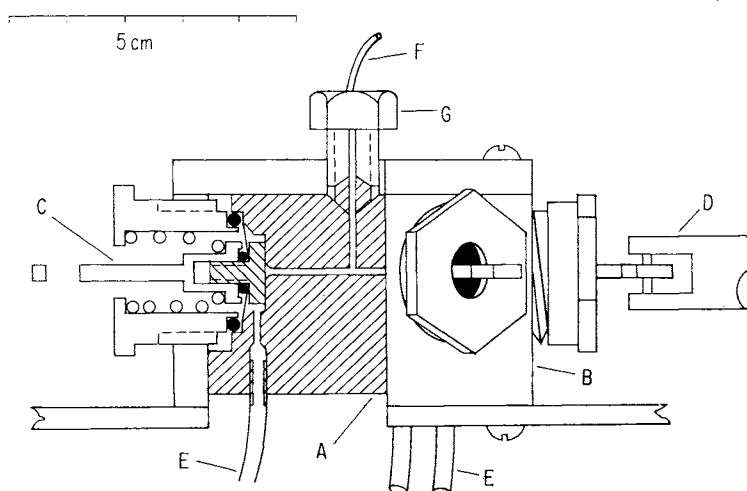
Valve assembly. A, PTFE block; B, stainless steel casing; C, S.S. shaft; D, solenoid core; E, PTFE tubes from reservoirs; F, feed line; G, sealing bolt
